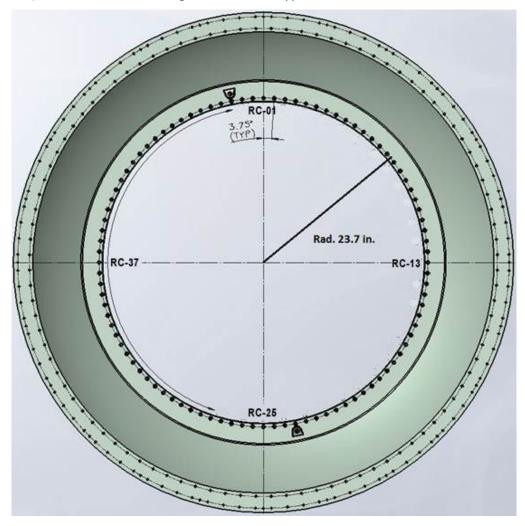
X(59.93) Threaded Fastener Coordinate Location and Dimensions
